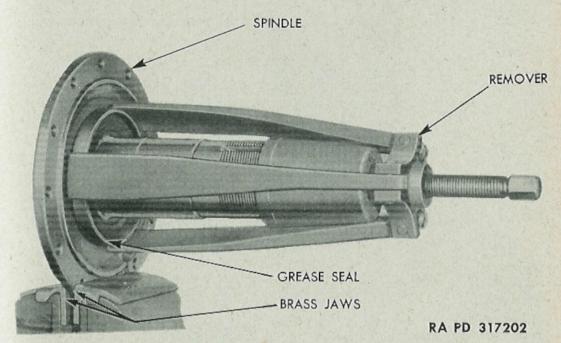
Removing Hub Inner Grease Seal from Axle Spindle with Puller 41-R-2381-350
